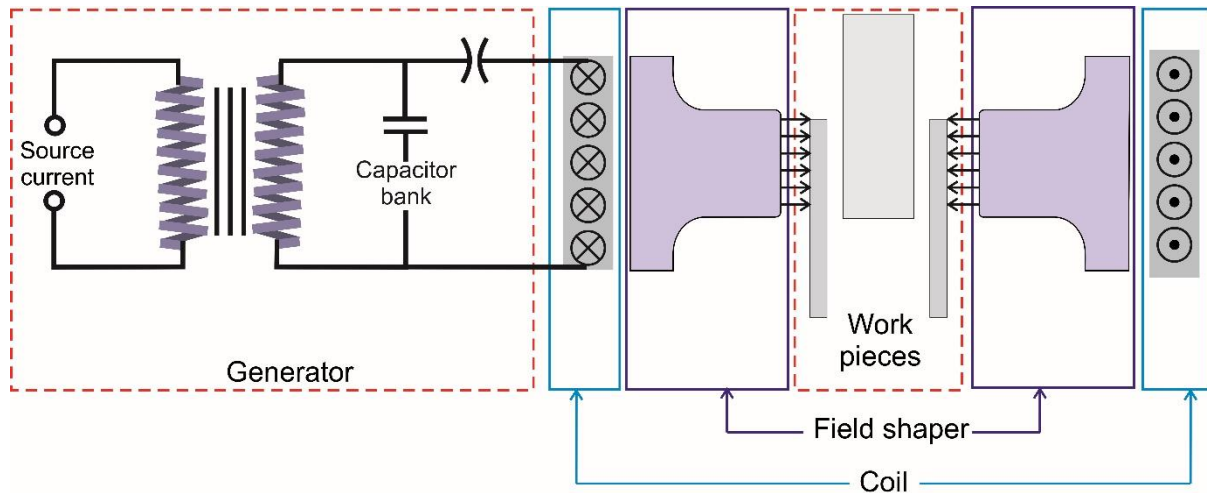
A schematic illustration showing the EMPF/EMPW unit consisting of a generator, a single turn coil, a fieldshaper, and workpieces (rod and tube). This configuration is typically used for welding or crimping of tubular geometries.
